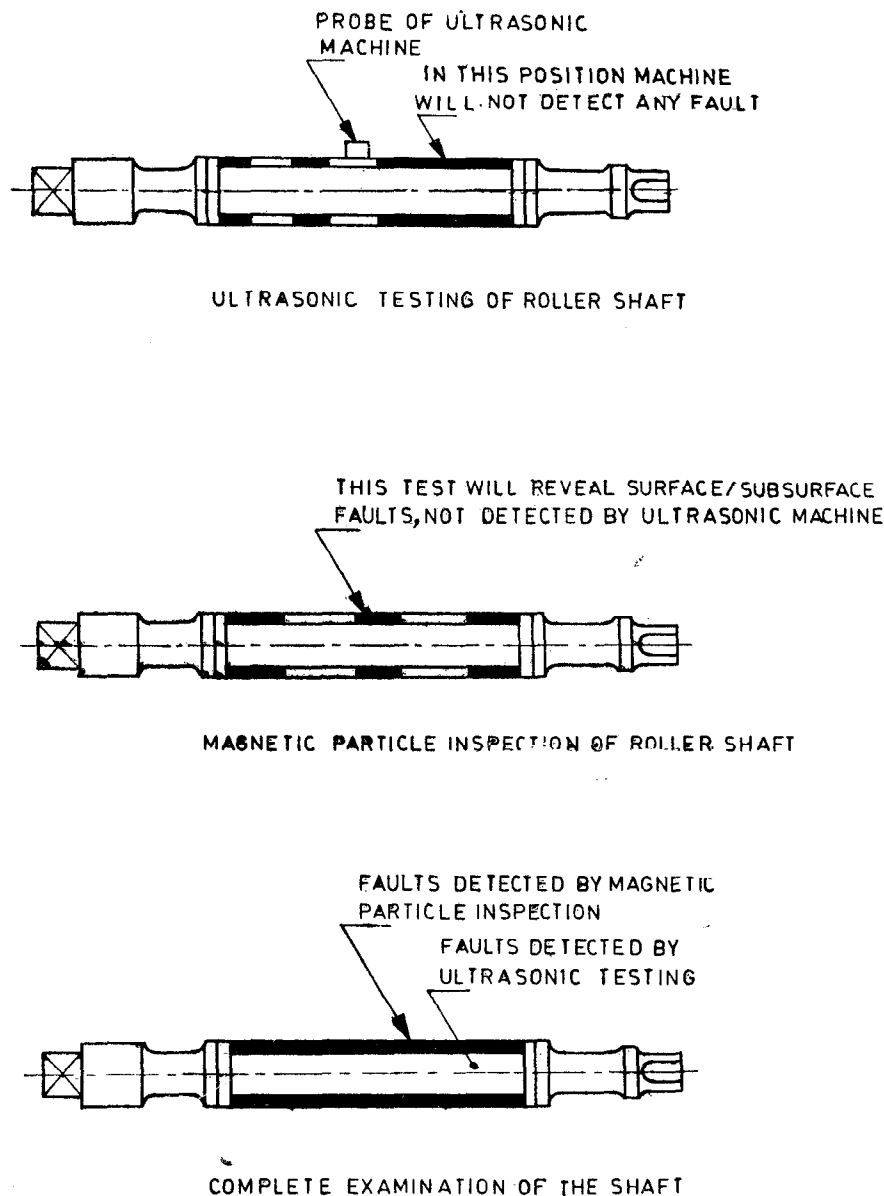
ULTRASONIC AND MAGNETIC PARTICLE INSPECTION OF ROLLER SHAFT
